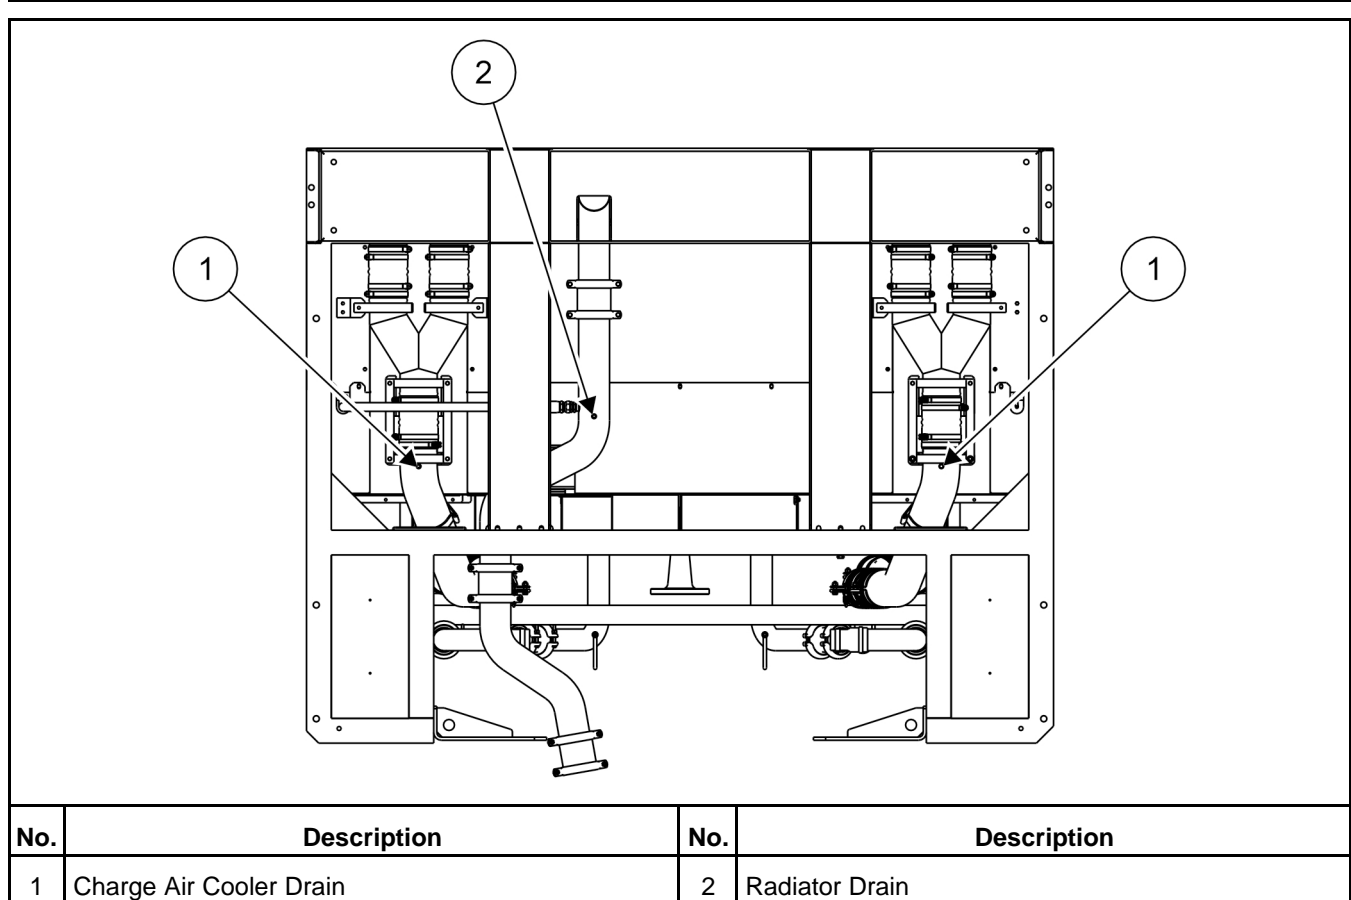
COOLING SYSTEM DRAINS, BOTTOM OF RADIATOR
